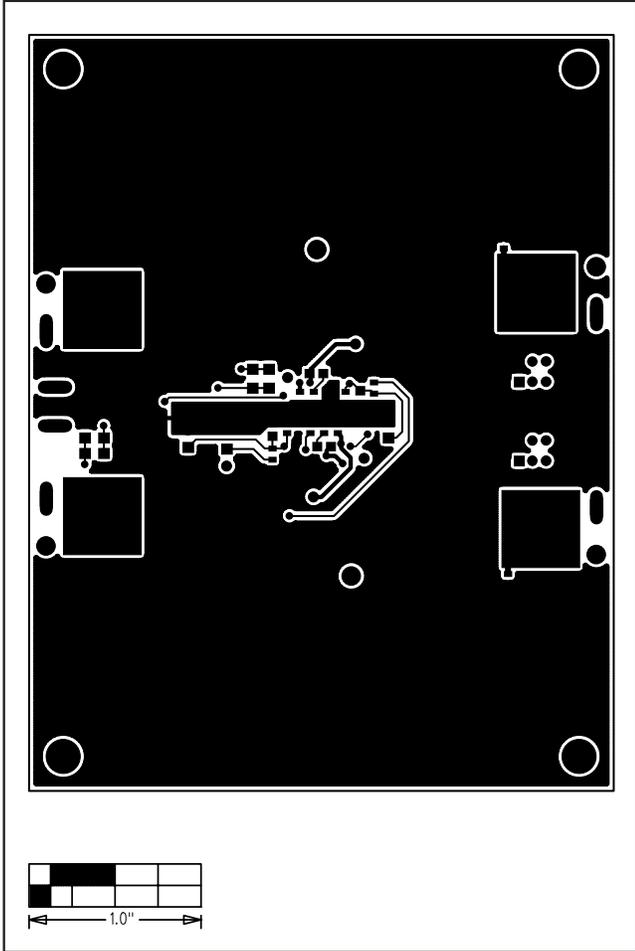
MAX5944 EV Kit PC Board Layout—Solder Side
